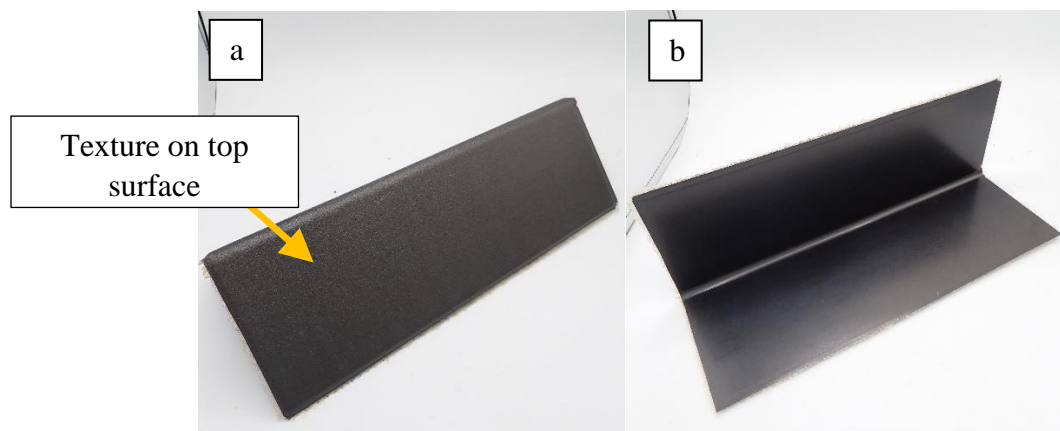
Cured unidirectional laminate before being machined into test specimens. Showing the top surface (a) and bottom surface (b). The texture of the top surface is from the breather fabric used to absorb excess resin.
